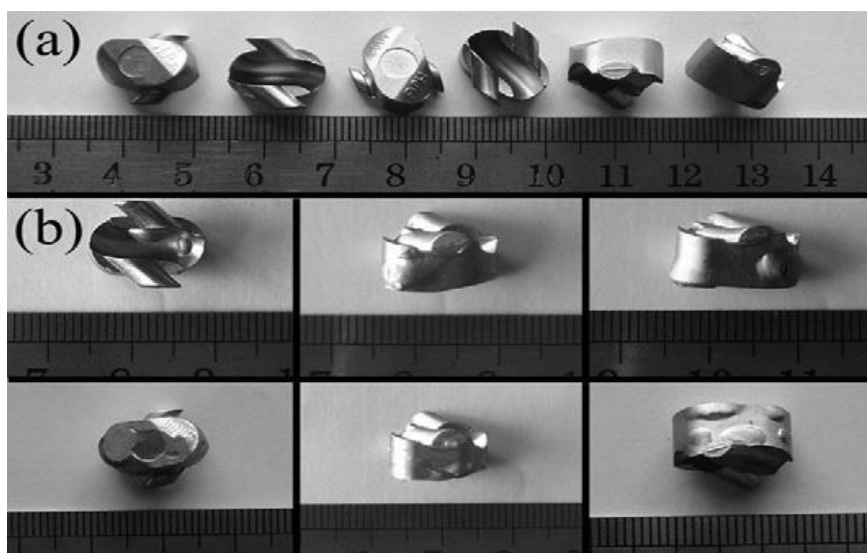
Pictures of SS 316L-CNT composite parts with complex shapes fabricated by MIM process: (a) sintered at 1175 °C; (b) sintered at 1180 °C (above three) or 1200 °C (below three).
